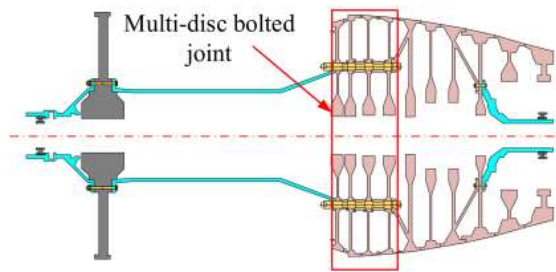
Sketch of a certain type of aero-engine compressor with a multi-disc bolted joint.
